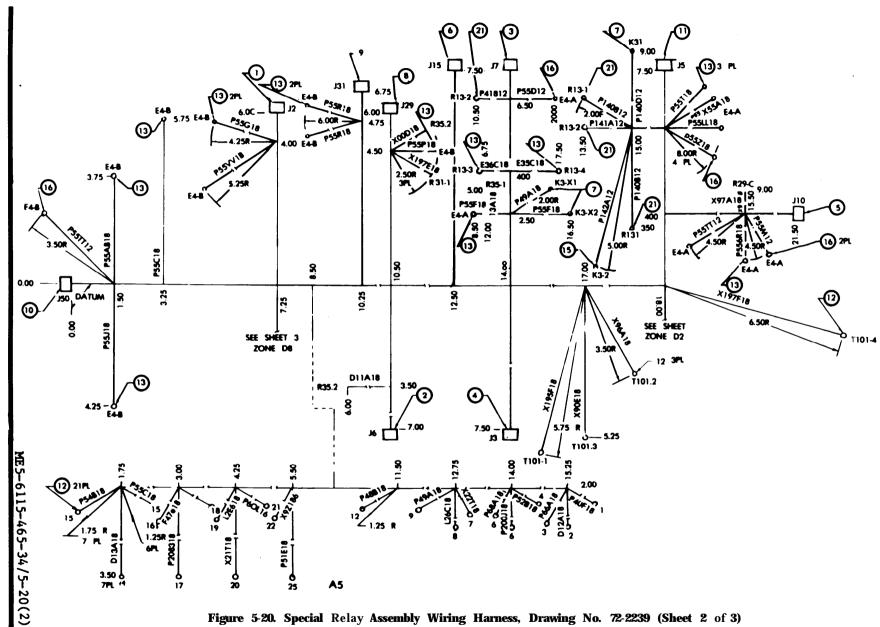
Special Relay Assembly Wiring Harness, Drawing No. 72-2239 (Sheet 2 of 3)
